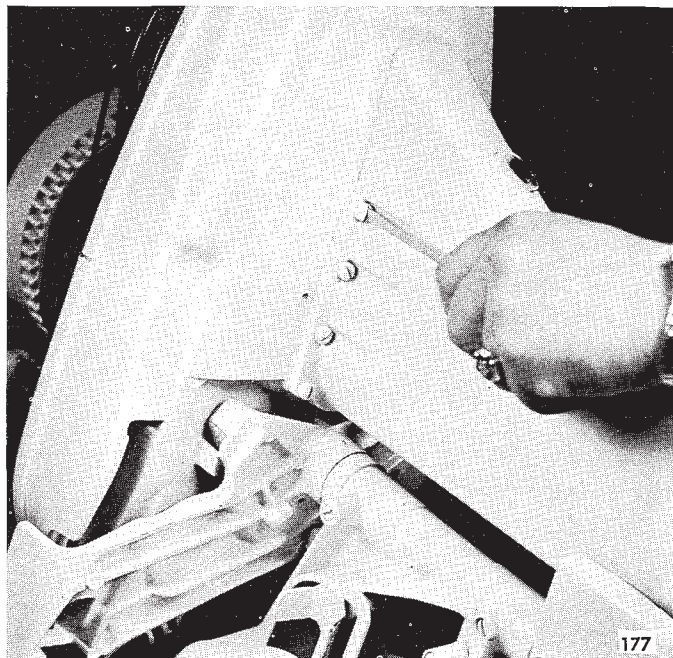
REMOVING POWER HEAD ATTACHING SCREWS
